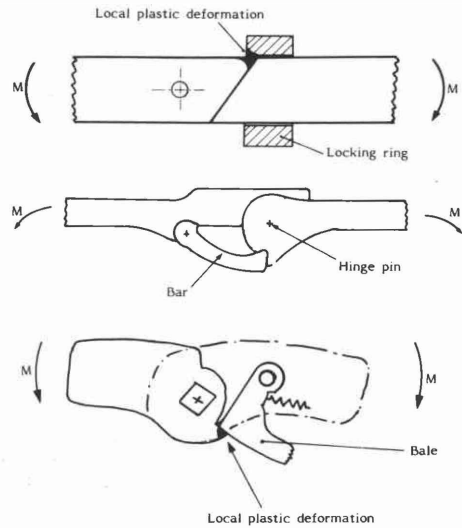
Undesirable failures. Top, failure of a ring lock. Centre, failure of barlock. Bottom, failure of a bale lock.
